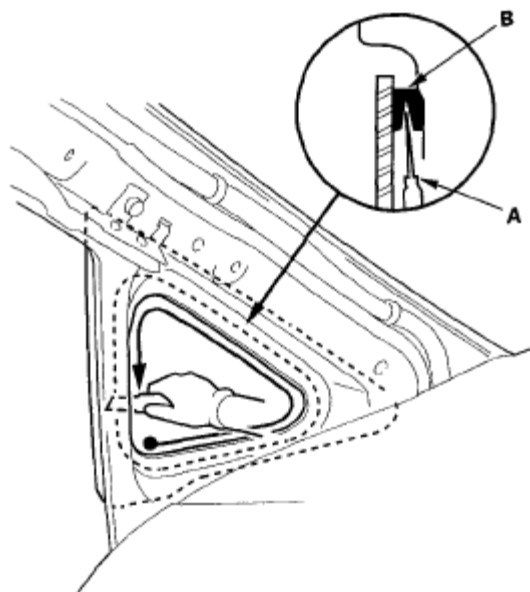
Cutting Through Front Corner Glass Adhesive Using Knife
